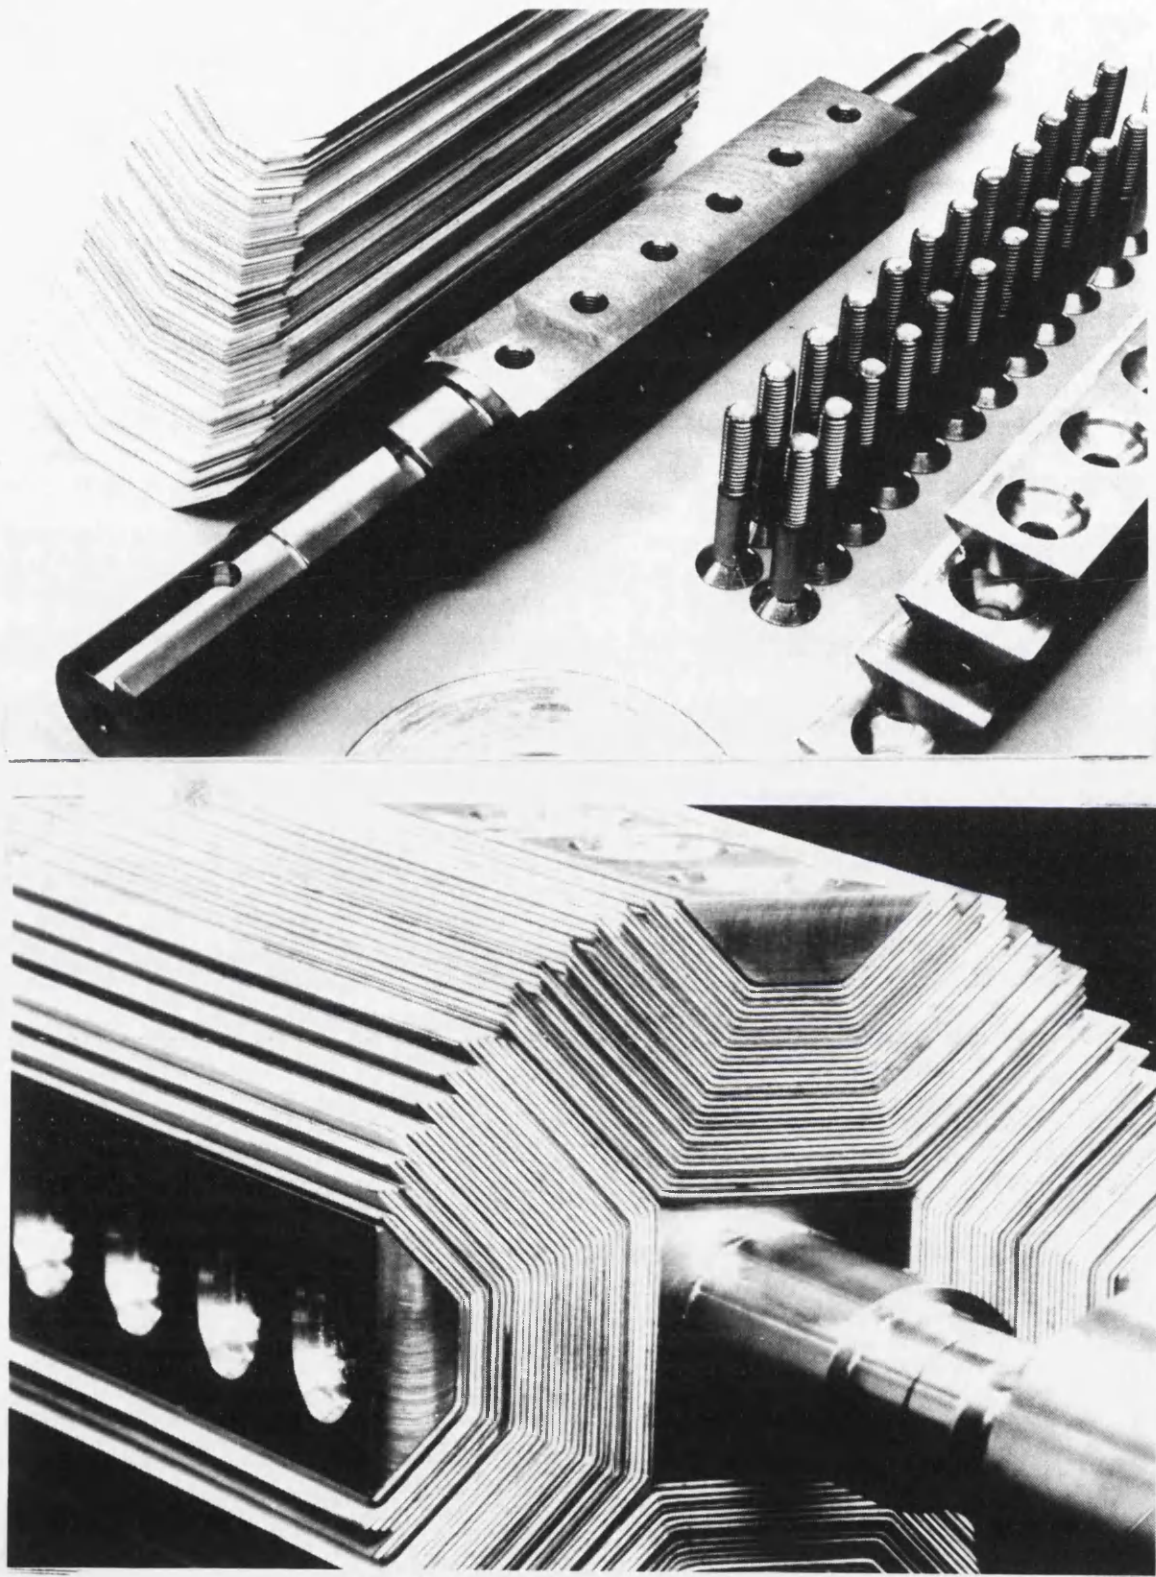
Top : 7.5kW rotor components before assembly. Bottom : Assembled 7.5kW axially-laminated rotor before turning and grinding operations.
